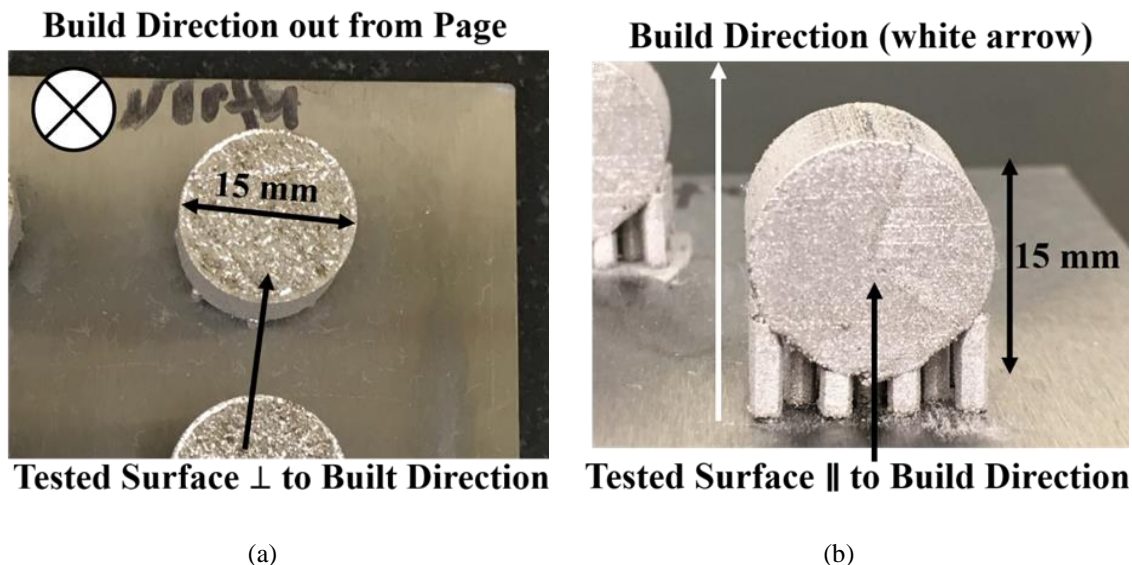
Printed samples (187 W, 800 mm/s) with build orientations such that the surface tested for corrosion was (a) perpendicular and (b) parallel to build direction
